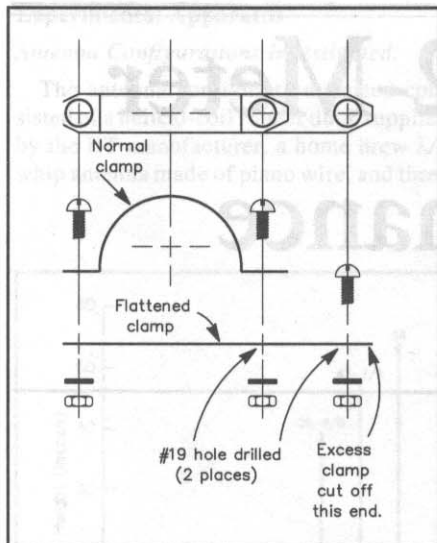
Detail of clamp assemblies. Both clamp assemblies are the same.
